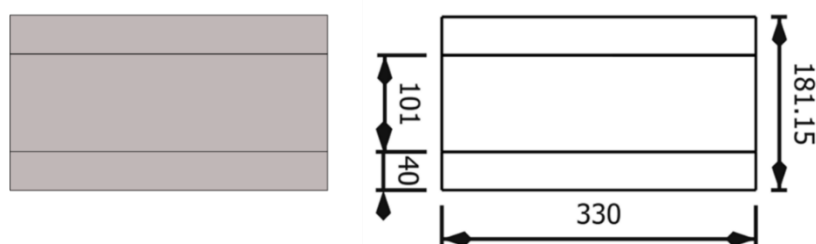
Down view of the schematic representation of the calorimetric assembly (reactor, heat flow sensors and heat sink). Dimensions in millimetres.
